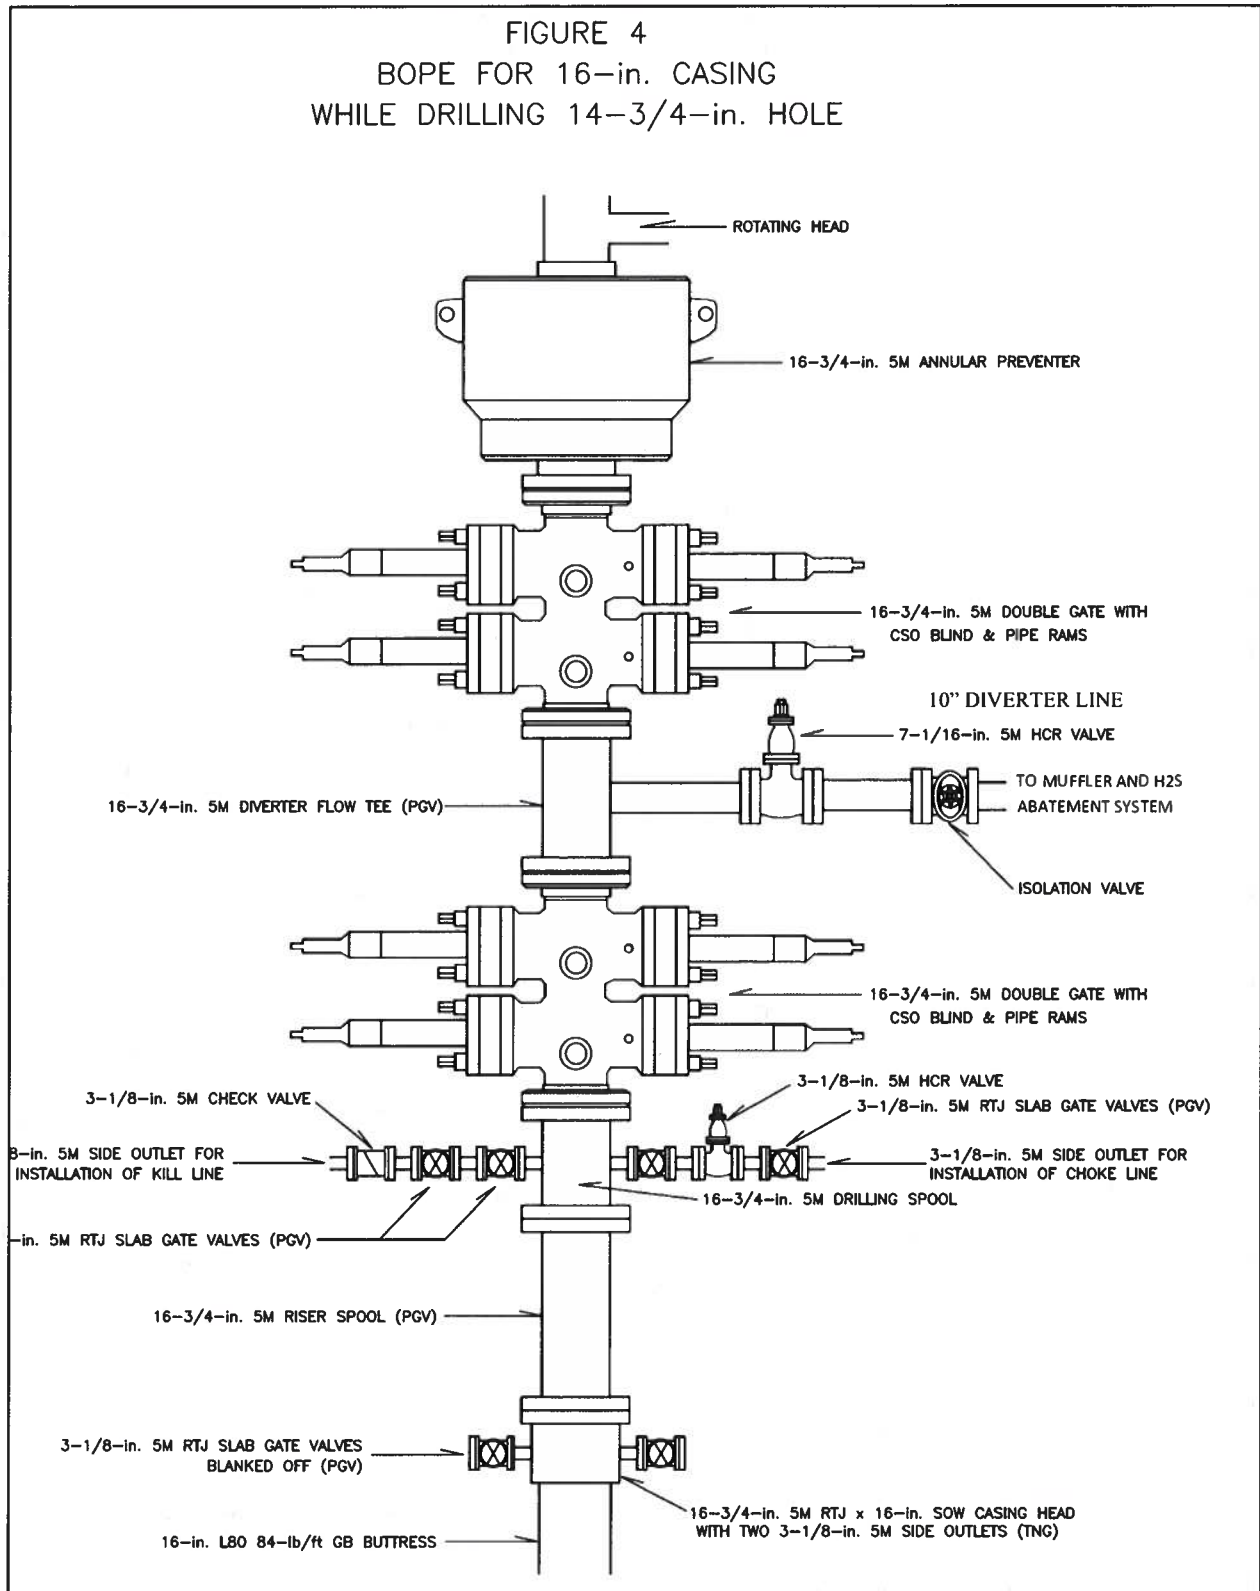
BOPE for 16-inch casing while drilling 14-3/4-inch hole.
